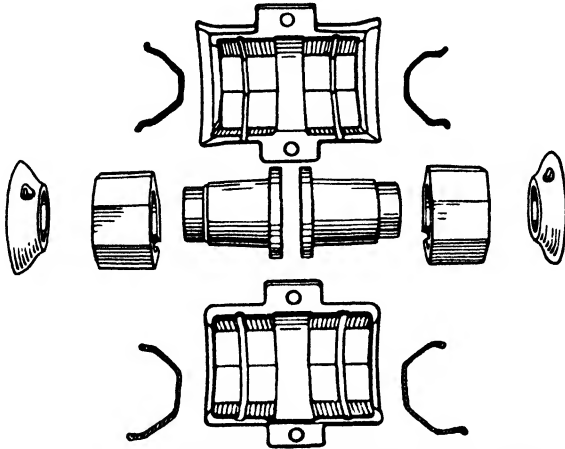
The parts of a chilled-iron disk-harrow bearing.
